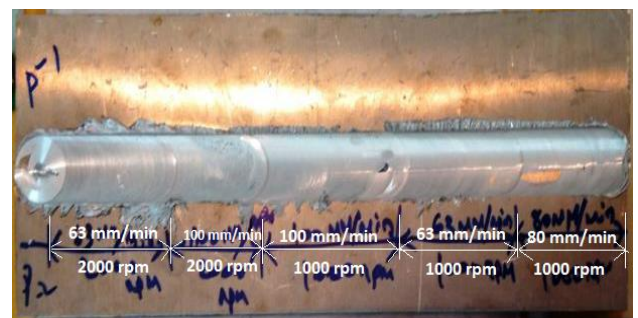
Weld Bead of FSW on AA6061-T6
